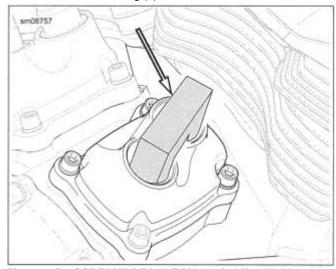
SCREAMIN' EAGLE Magnetic Lifter Holder
